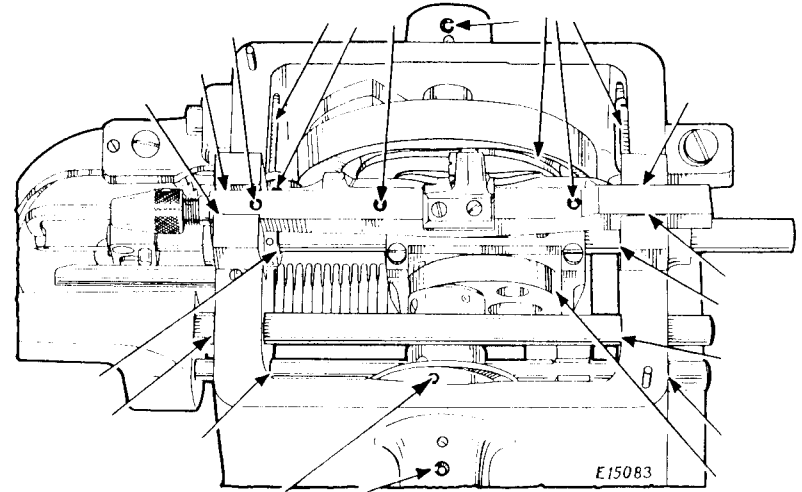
Oiling Points at Top of Machines 176-23 and 176-24
